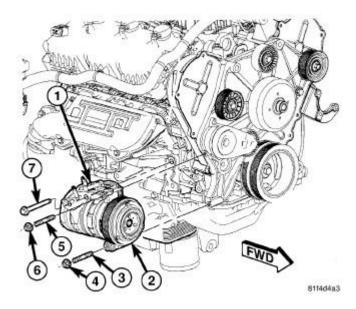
Removing/Installing A/C Compressor Courtesy of CHRYSLER LLC
